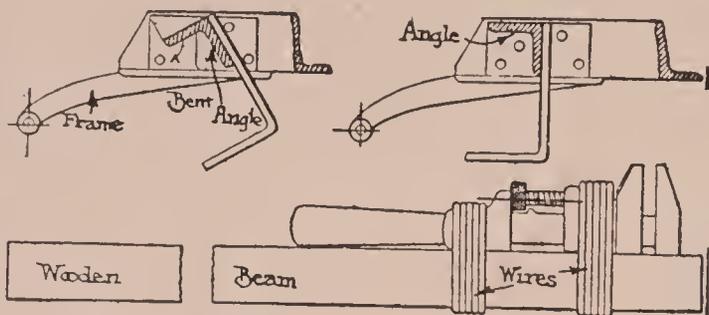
Method by which a frame was bent back into place so the car could be operated, with no other tool than a wrench.
